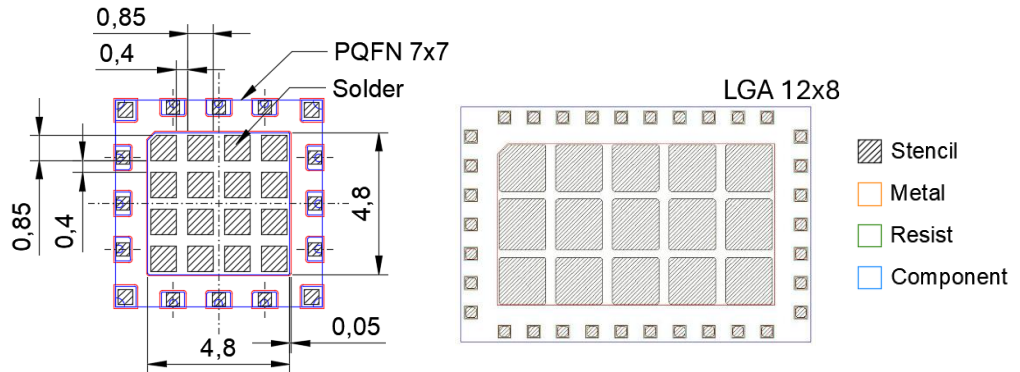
Example of Solder paste dimensions on the land area for a large die pad
